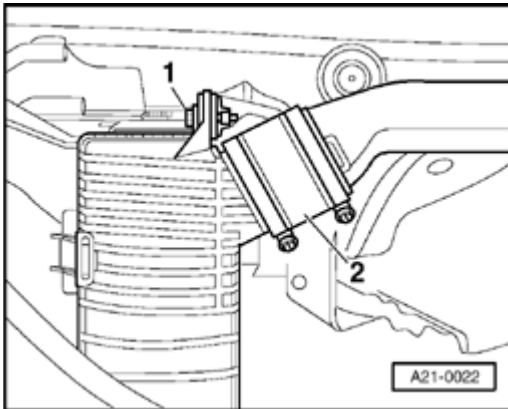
Disconnecting Air Hose From Bottom Of Charge Air Cooler & Removing Lower Securing Bolt For Charge Air Cooler
